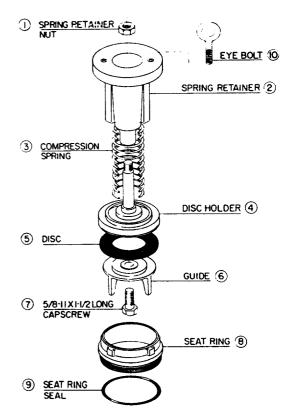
CHECK VALVE ASSEMBLY 21/2"-6" MODEL 6CM
